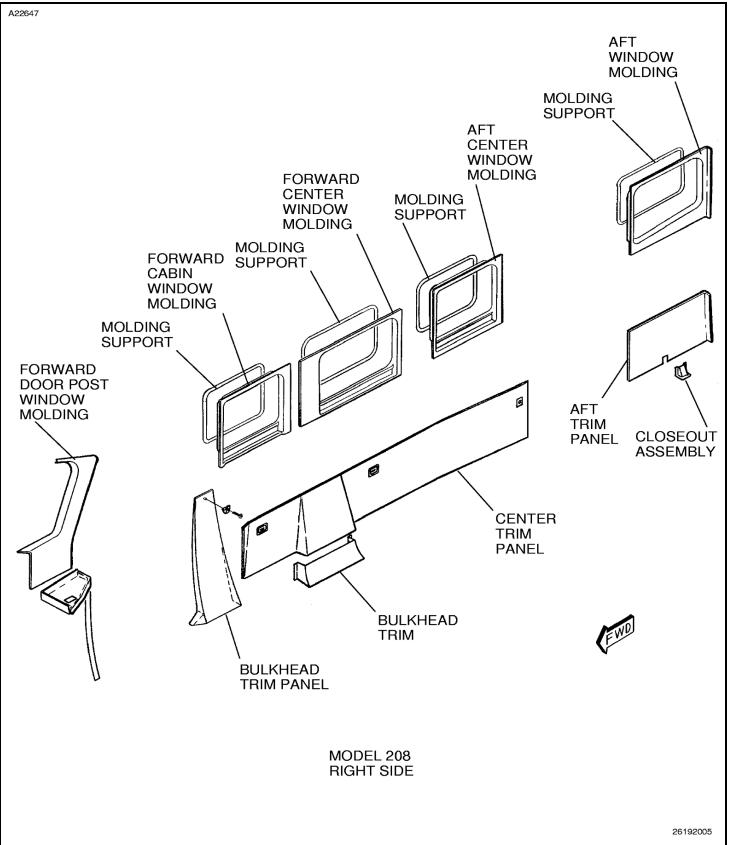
Sheet 1 : Upholstery Side Panels and Trim Installation
